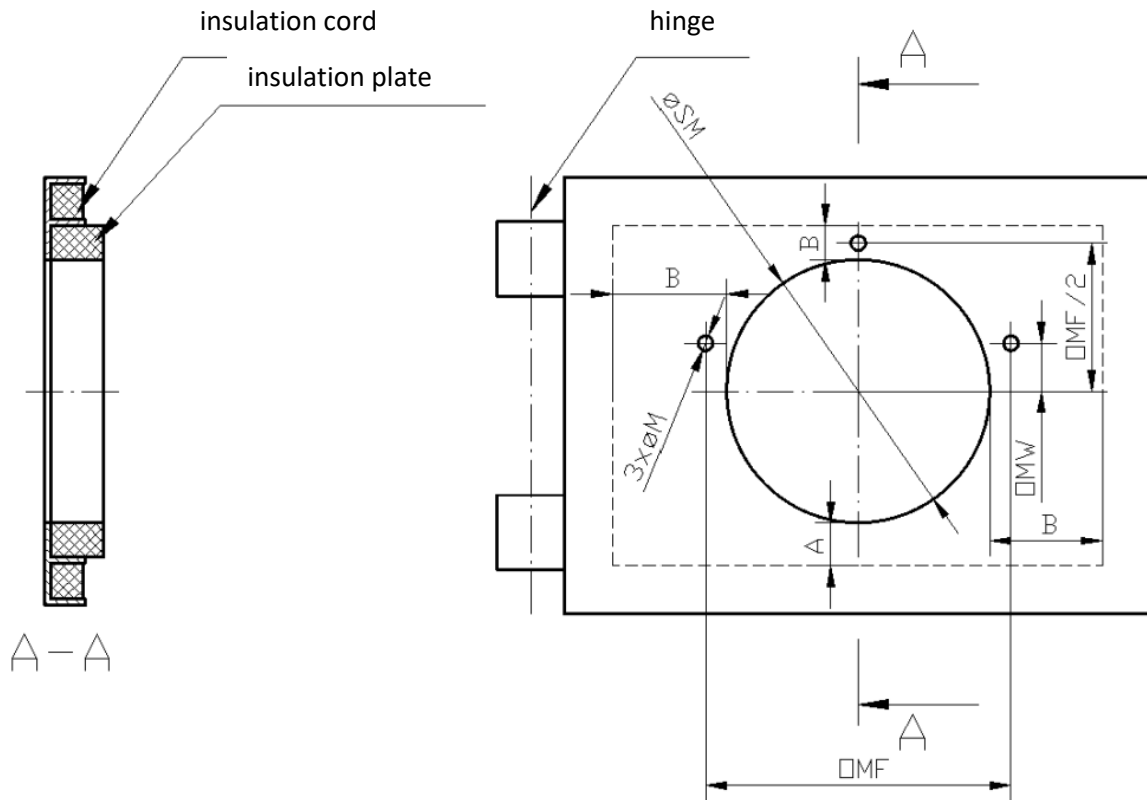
Diagram for the location of the mounting holes for burners with insulating jackets and a mounting plate for burner type 10-50 kW.
